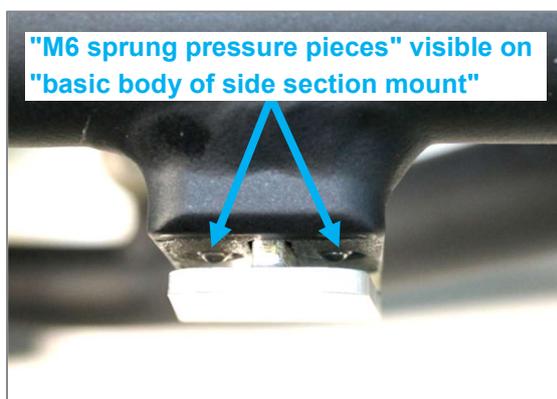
Front side of the sprung pressure pieces visible (view from top)
